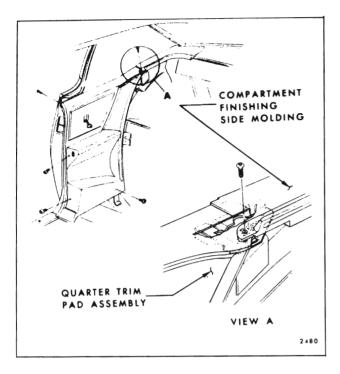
Quarter Trim Assembly - Cadillac "E" Styles
